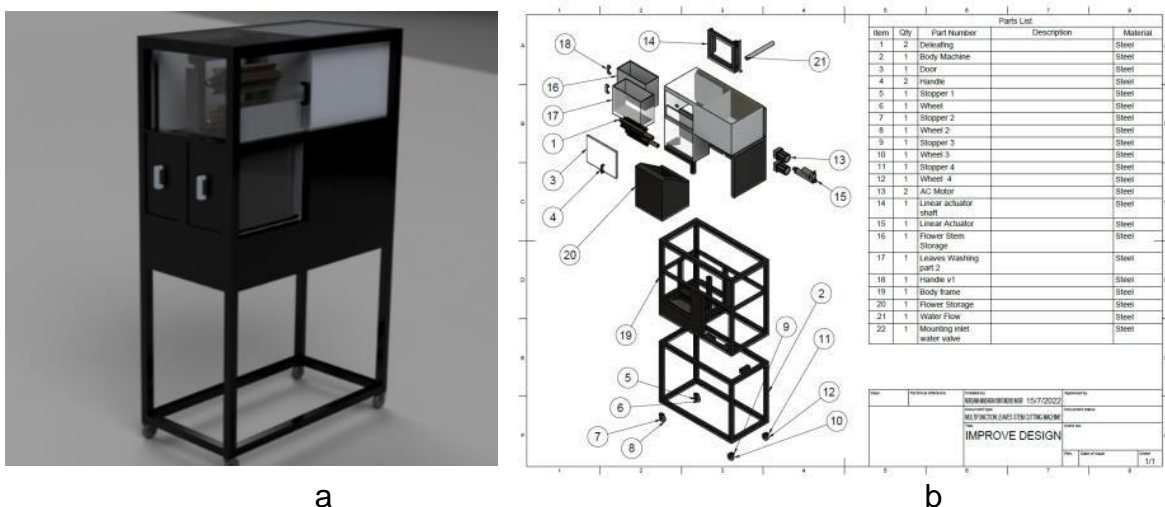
(a) Improved 3D modelling (b) Technical drawing and bill of material for the multifunction leaves stem cutting machine detailed drawing.
